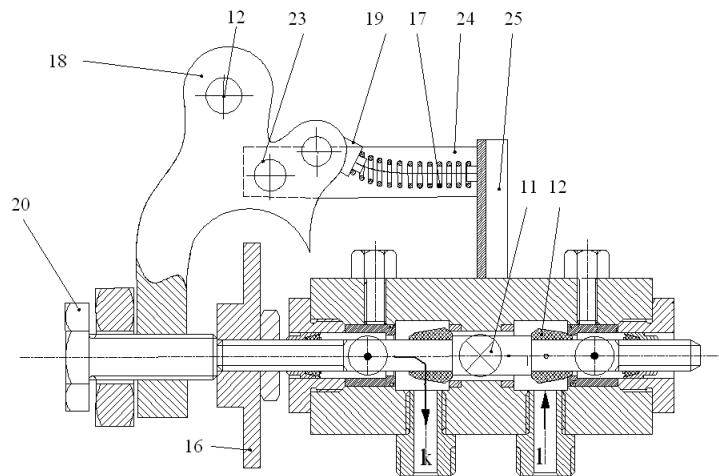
Cross section in vertical plane through the hydraulic directional control valve: 11-shaft; 12- fixed valves, 16- bushing by which the shaft is driven through mechanical control, 17- swinging spring, 18-fork, 19- rotation coupling, 20- adjustable screw, 23-shaft, 24- fork carriage, 25- mechanical control support profile, m- connecting pipe for pressurized water supply, n- discharge connecting pipe, k,l- consumers of directional control valve actuating the multiplier.
